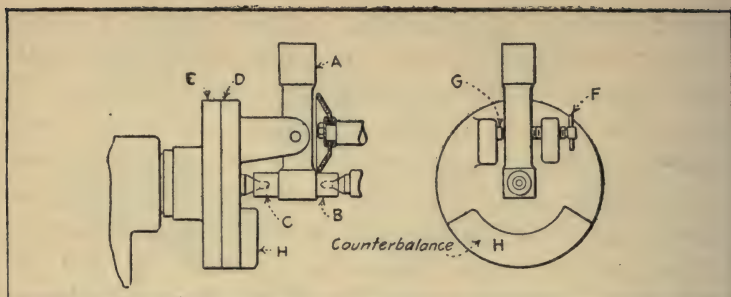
FIXTURE FOR GRINDING UNIVERSAL JOINTS
